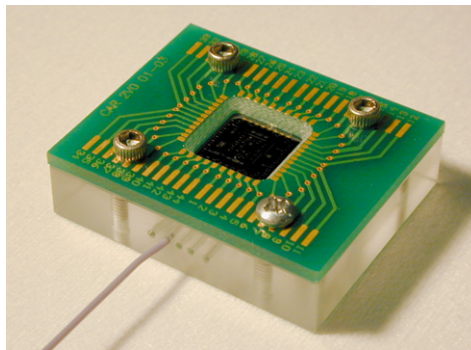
Testing jig: an acrylic base with an PCB cover.
